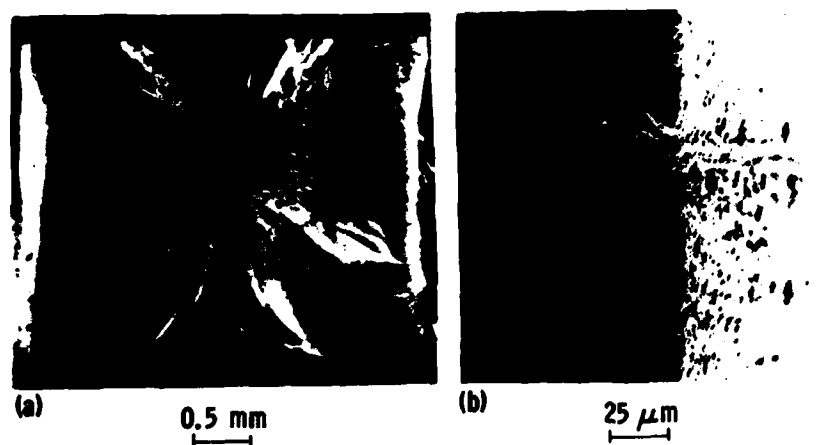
Appearance of bend bar from shroud 1-Af (1) after fracture. (a) Matching fracture surfaces and (b) scanning electron photomicrograph of the fracture origin. This specimen failed from a mixed defect, i.e., a machining striation interacting with porosity as seen in (b).
